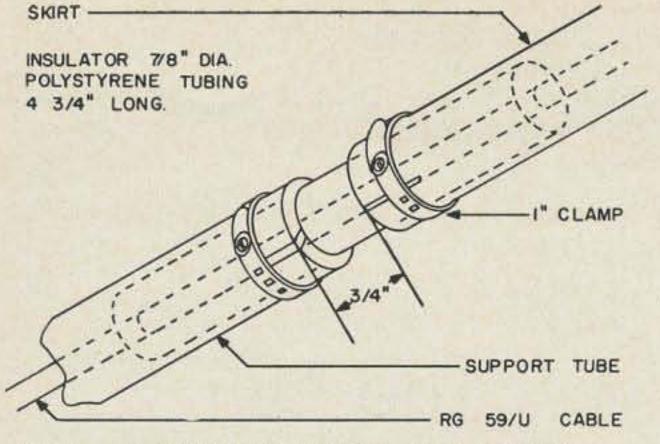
INSULATOR AND SUPPORT TUBE ASSEMBLY.
